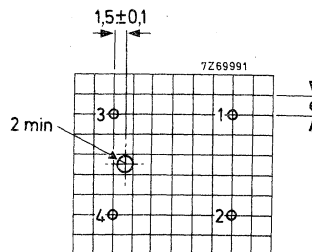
Hole pattern for mounting on a printed-wiring board (component side). Hole diameter $1,3 \pm 0,1$ mm. $e = 2,54$ mm (0,1 in).
